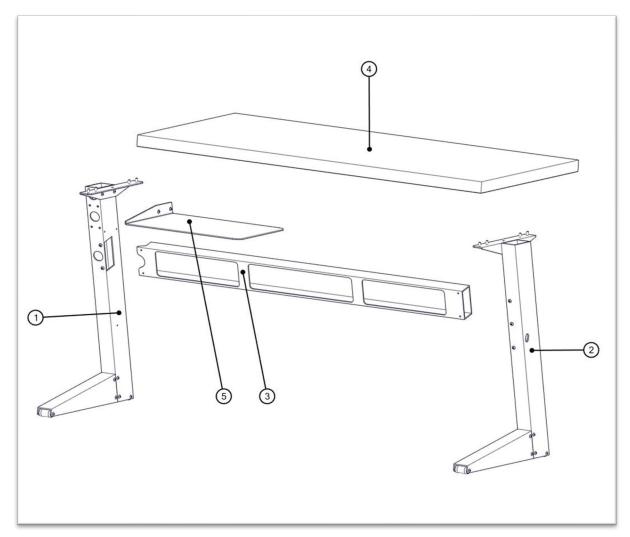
GlobalVision Flatbed Scanner Table Parts Assembly
